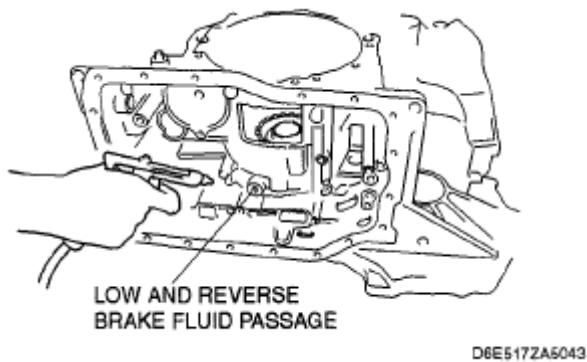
Applying Compressed Air To Low And Reverse Brake Fluid Passage
